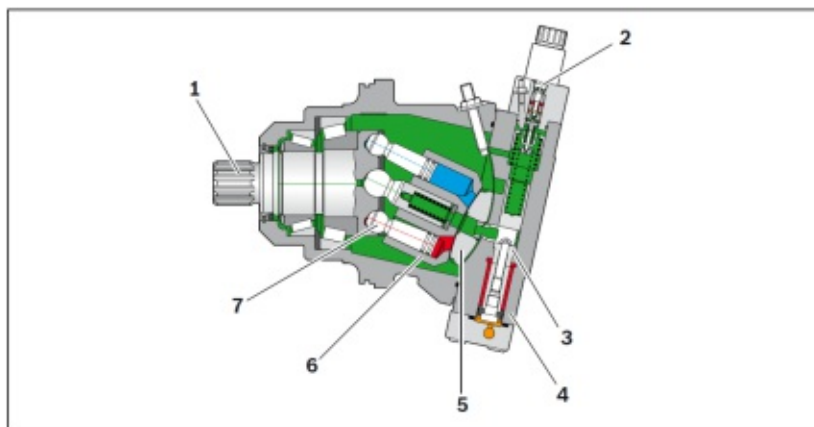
Layout of A6VE axial piston motors (taken from [126, p. 18/60])
